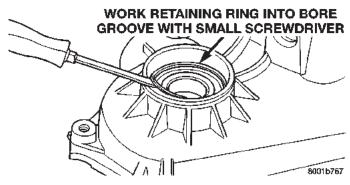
Installing Output Shaft Front Bearing Retaining Ring
